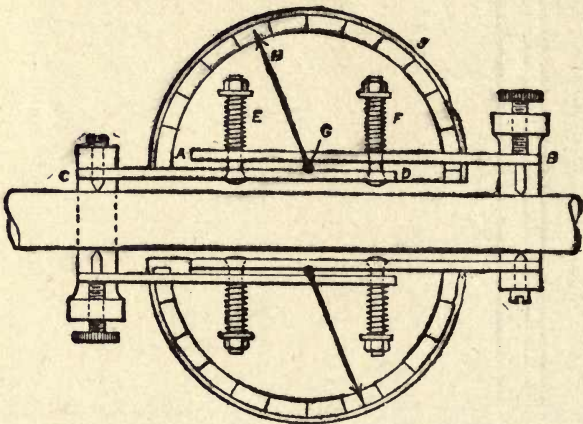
Stromeier's Rolling Pin Extensometer.
